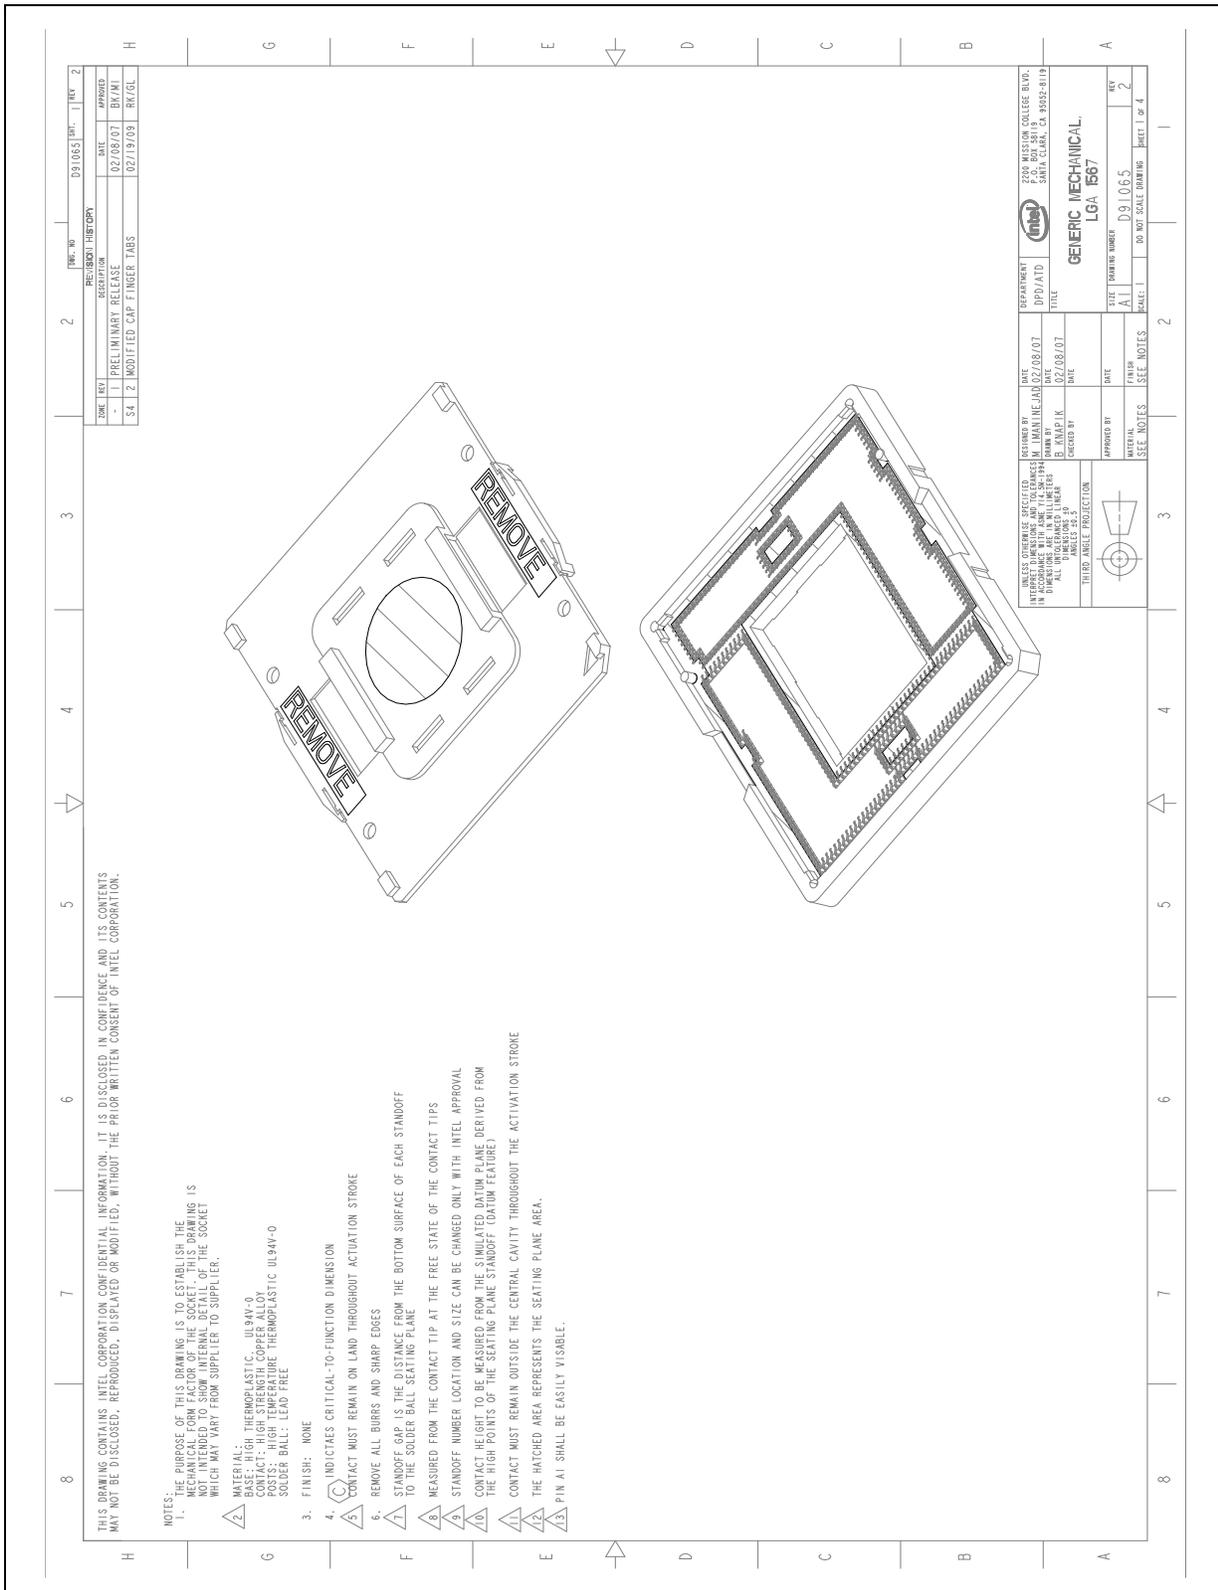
LGA 1567 Socket Mechanical Drawing – Sheet 2 of 4
